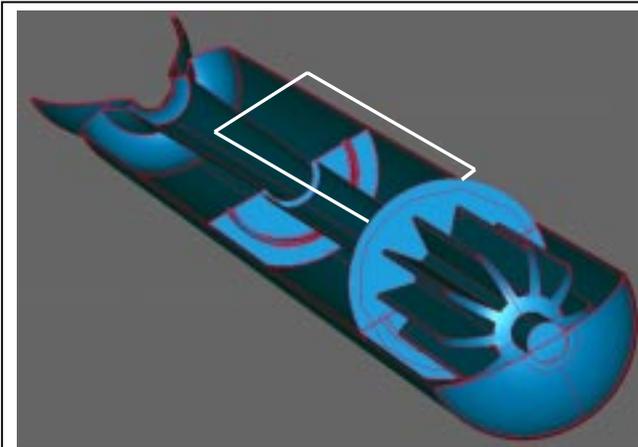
Cutaway drawing of Titan IV PQM-1 motor shows three-segment solid propellant design.
